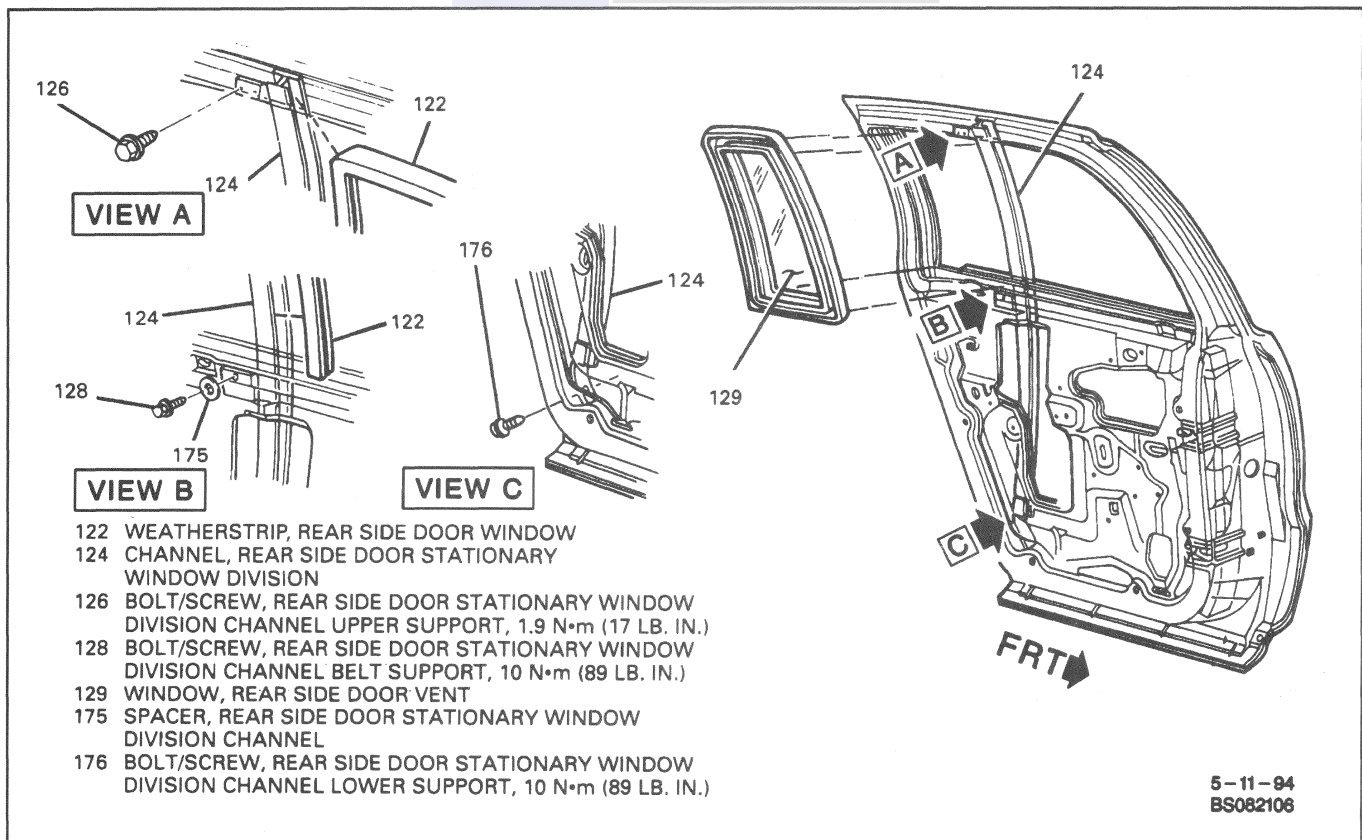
Removing Rear Side Door Vent Window-(Buick Sedan)
